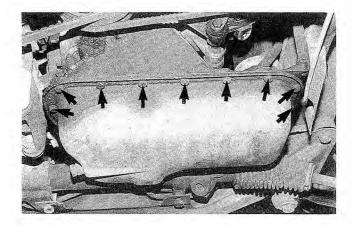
Lower oil pan retaining bolts (arrows).
